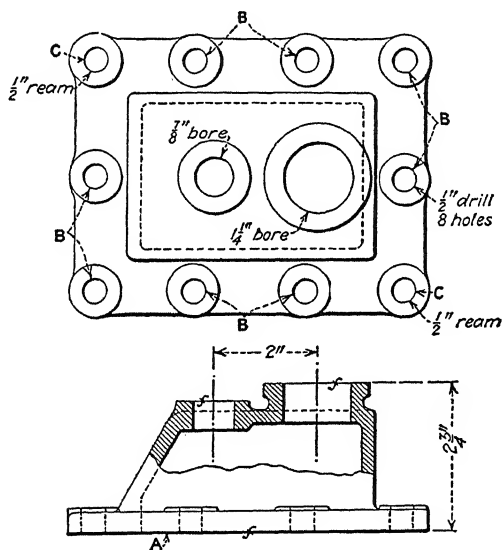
Example Showing the Establishment of Working Surfaces To Be Used in Locating the Work During Machining
